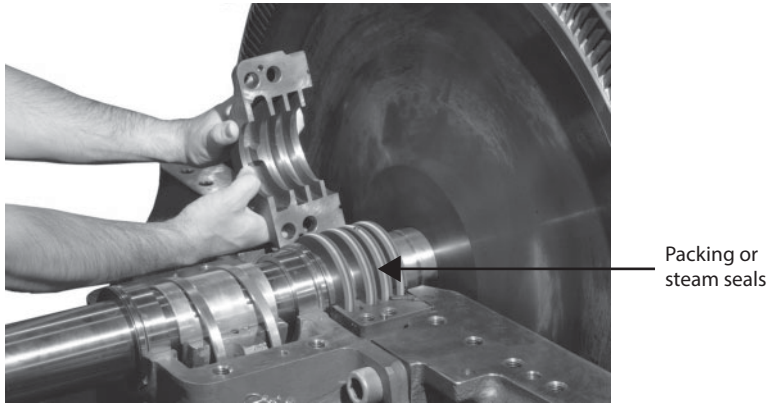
Steam seals or Packing. Notice the carbon seals and housing. (Courtesy of Elliott Group)
